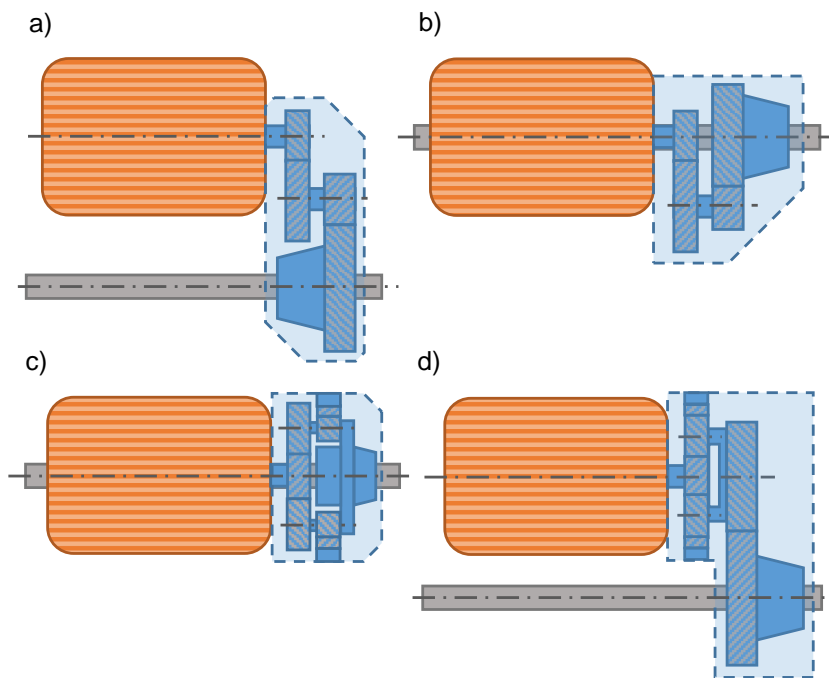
Exemplary gearbox concepts for e-drives with a single electric machine; a) offset helical gearbox; b) coaxial helical gearbox; c) planetary gears; d) combination of helical and planetary gear stages [31]
